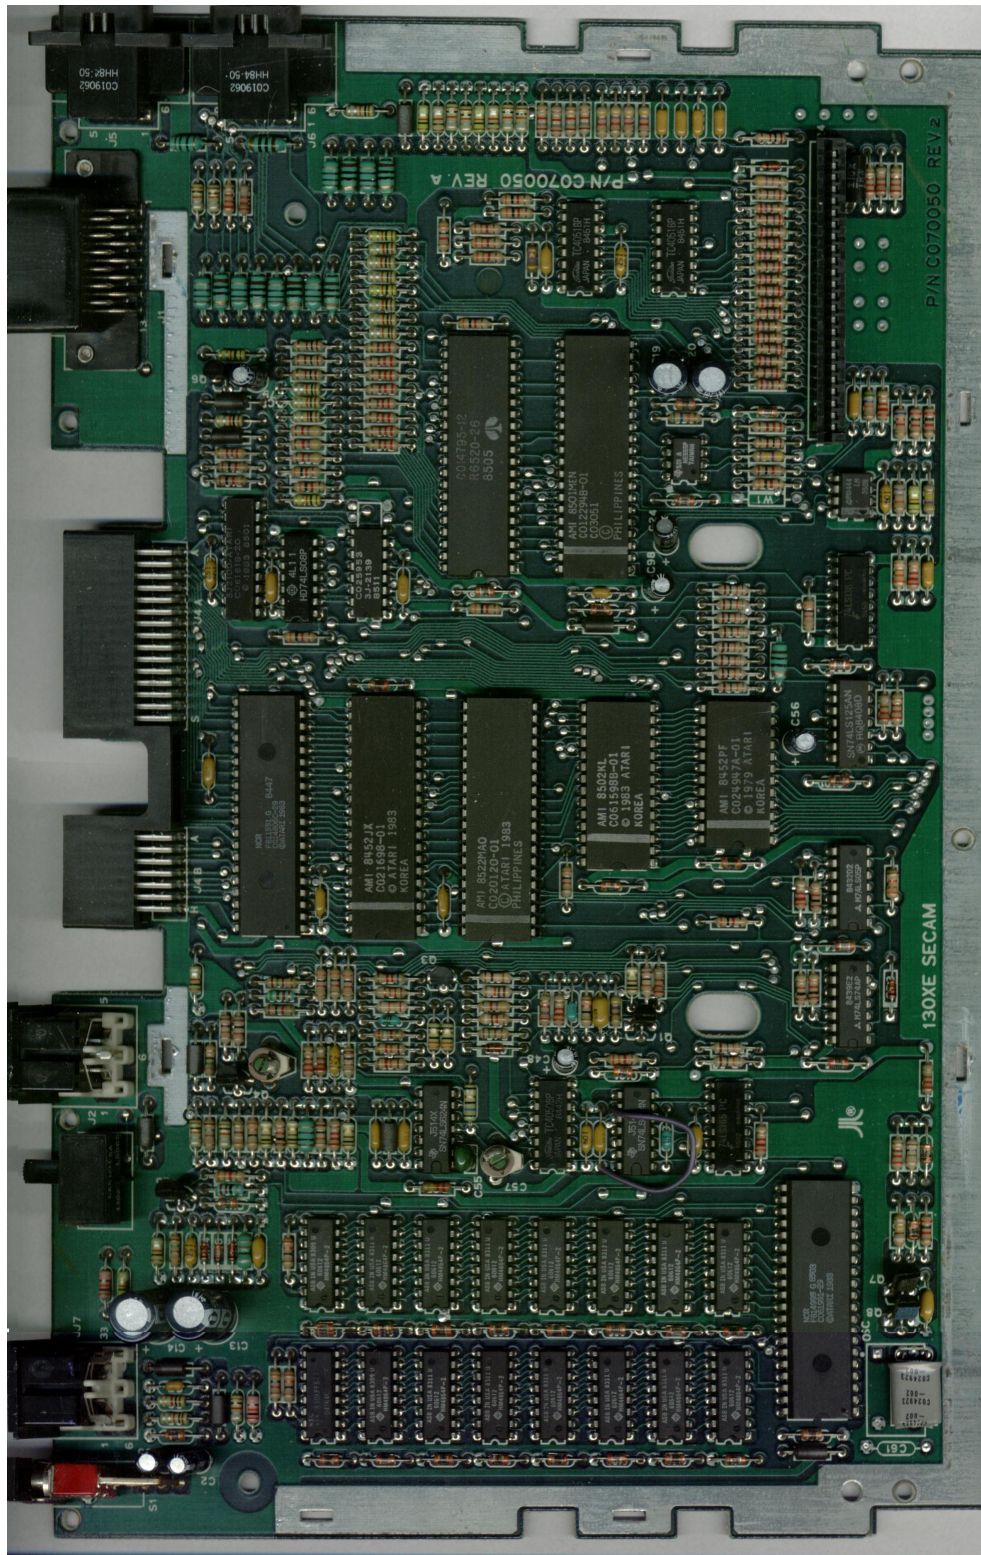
130XE SECAM CO70050 Rev.2 PCB
